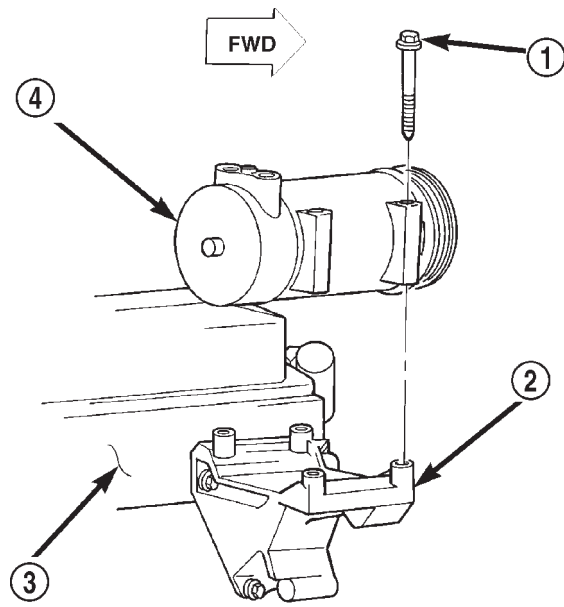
Compressor Remove/Install - All 2.5L/4.0L Engines
